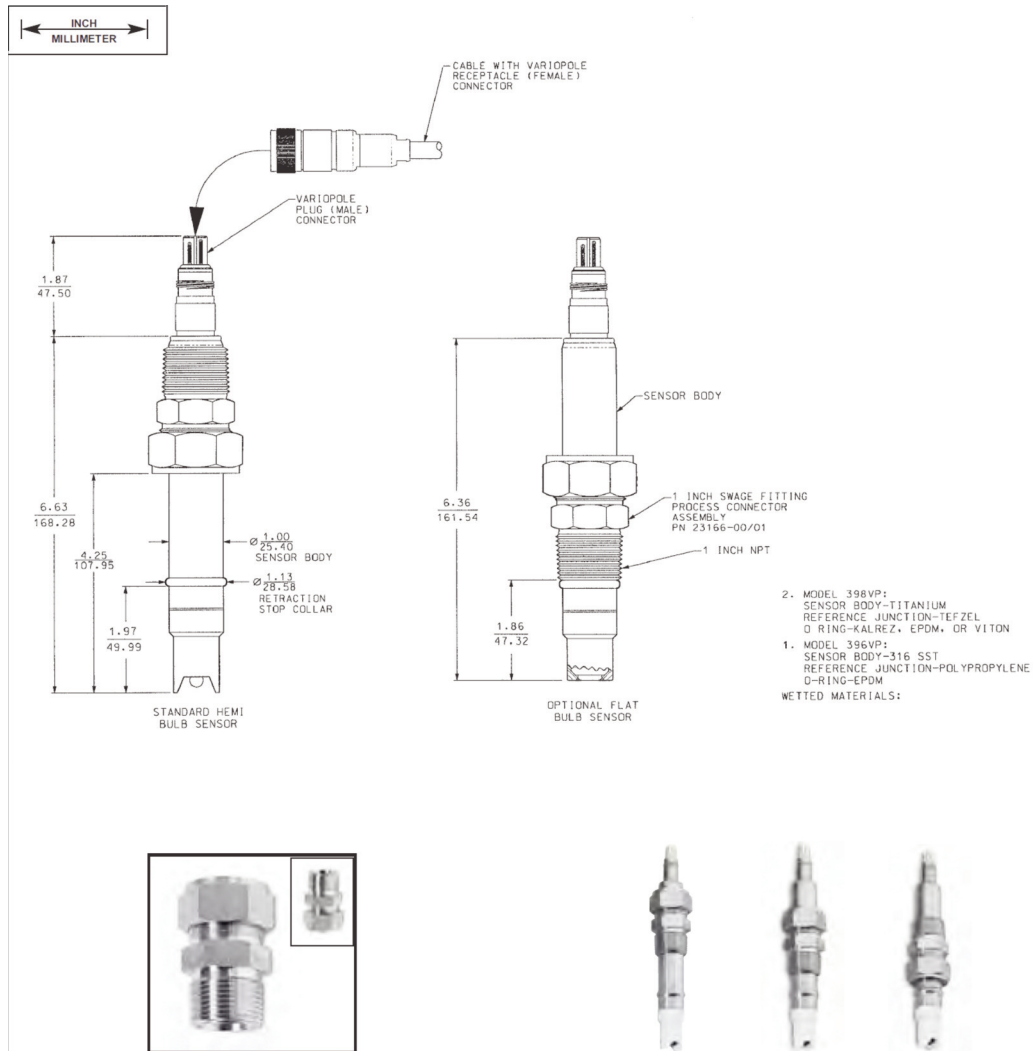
Rosemount 396VP and 398VP Sensor Dimensional Drawings (Shown with Process Connector)
